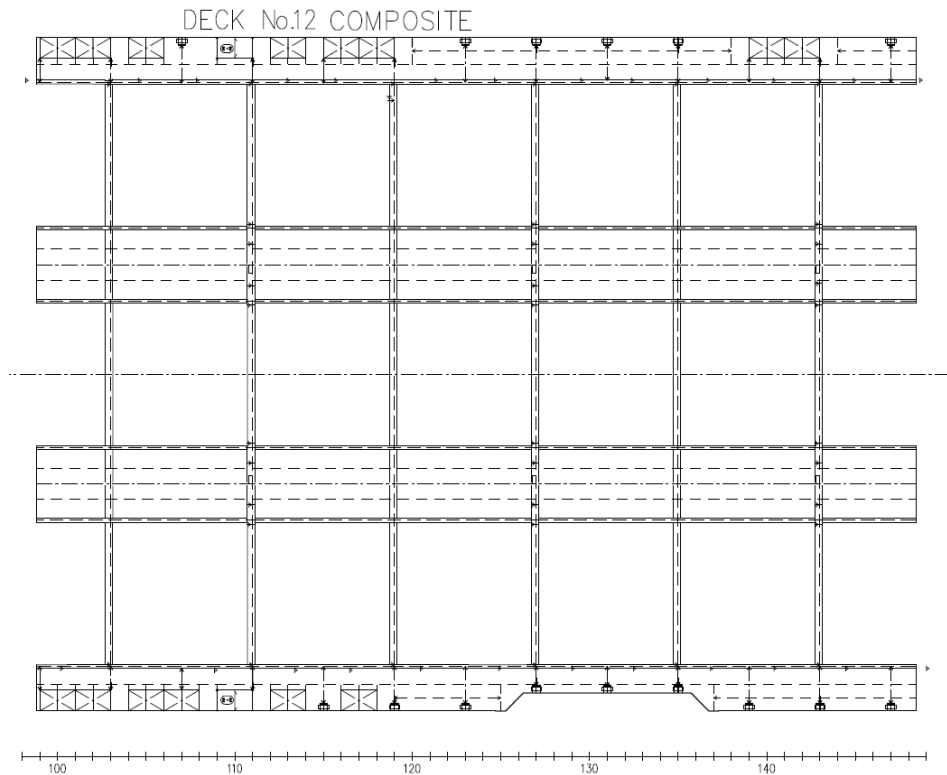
Design alternative 2 – steel structure arrangement– Deck top view
